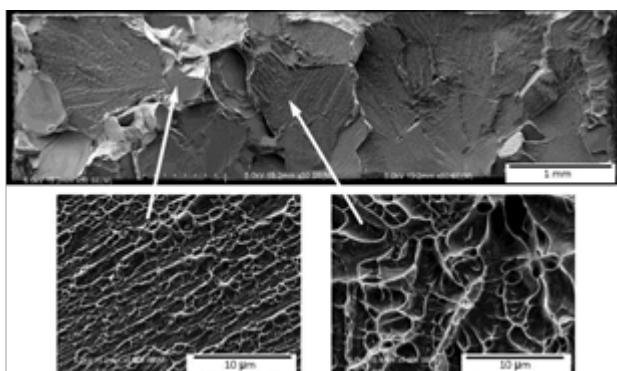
SEM images showing an example of fracture surface from GTAW Ti5553-Ti5553 weld joint
